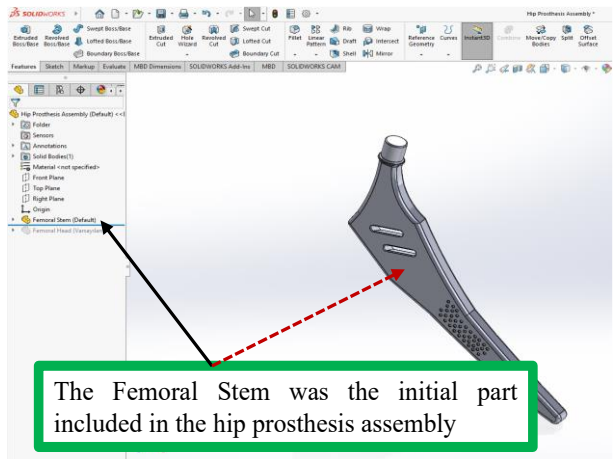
Initial insertion of the Femoral Stem component into the hip prosthesis assembly
